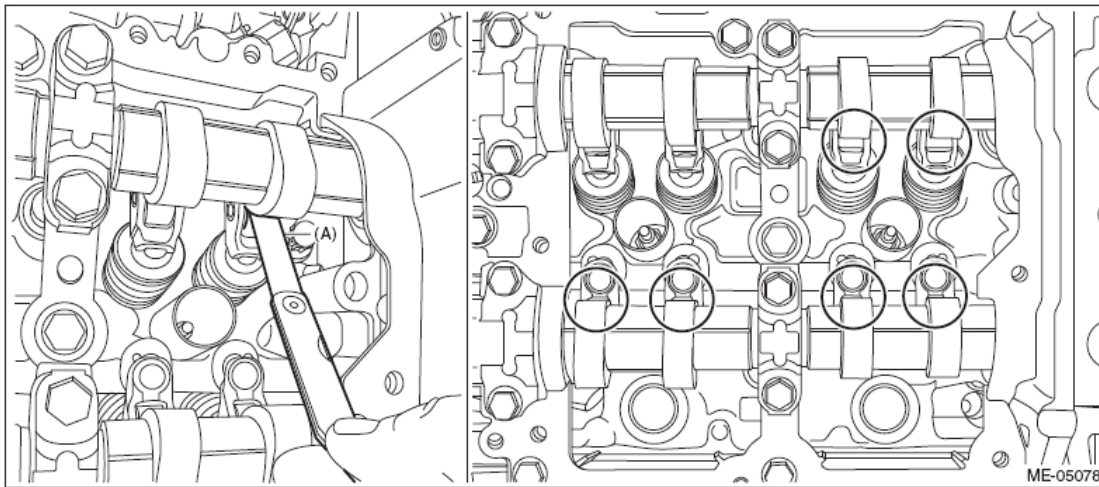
Measuring Roller Surface Of Cam Base Circle And Roller Rocker Arm Using Thickness Gauge
